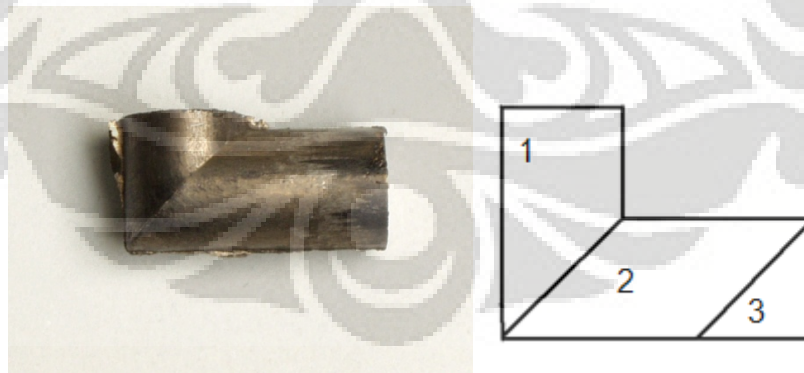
(a) ECAP sample; (b) Cutting ECAP samples into 3 parts
